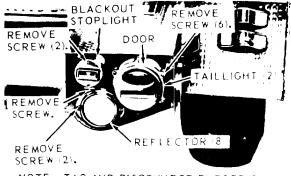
Trailer clearance lights, disassembly and reassembly.
